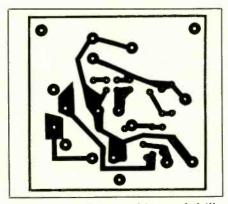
Actual-size etching-and-drilling guide for receiver's printed-circuit board.
